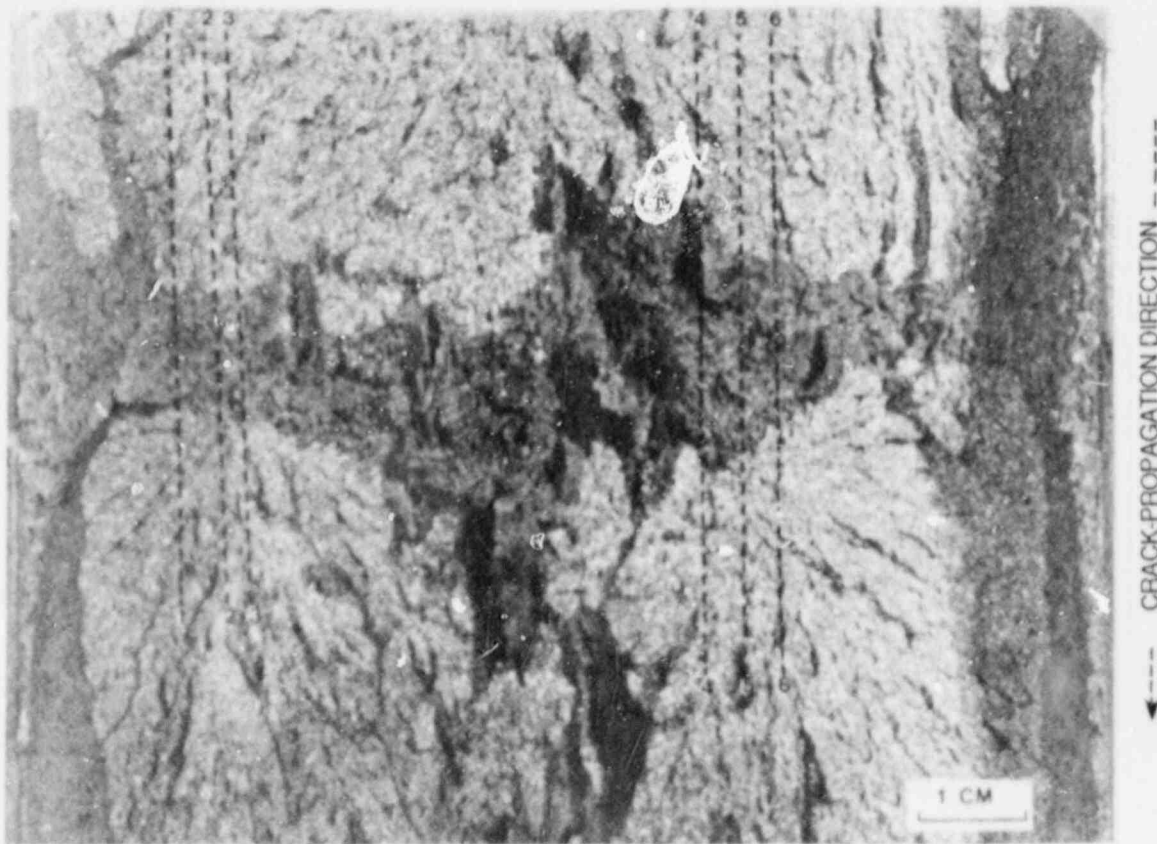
Fracture surface of WP-1.7 specimen. Lines 1-6 show the location where relative height measurements were performed.
